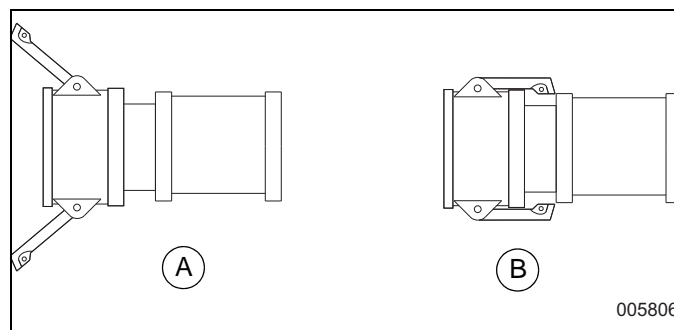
Opened Cam Lock (A) and Closed (Secured) Cam Lock (B)
